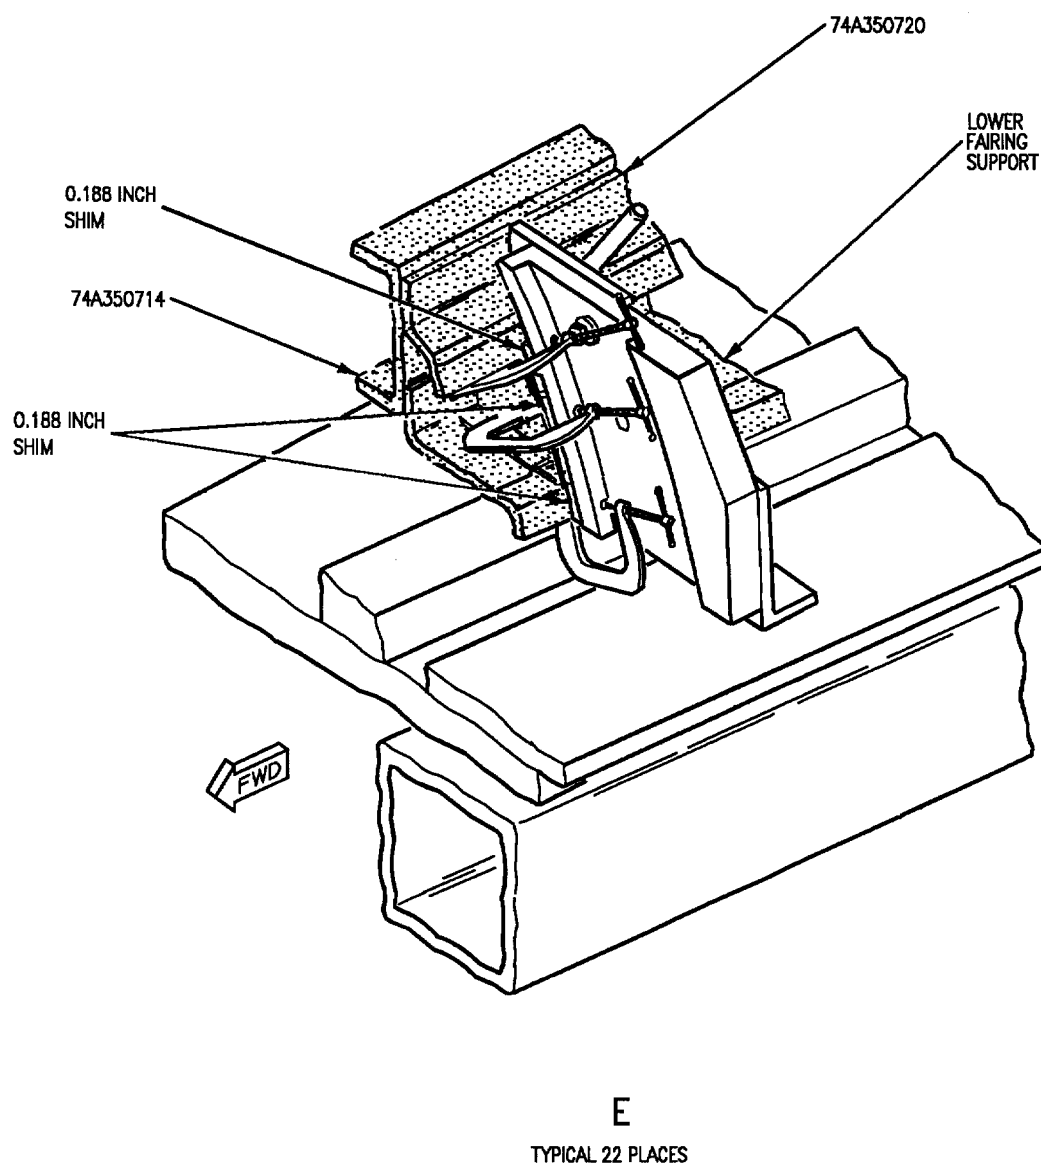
Inspection or Replacement - Lower Fairing Support (Sheet 4)
